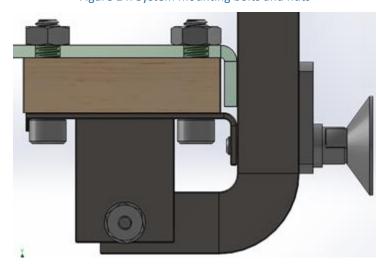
Pommel at engaged stated while mounted on a lipped wheelchair plate
